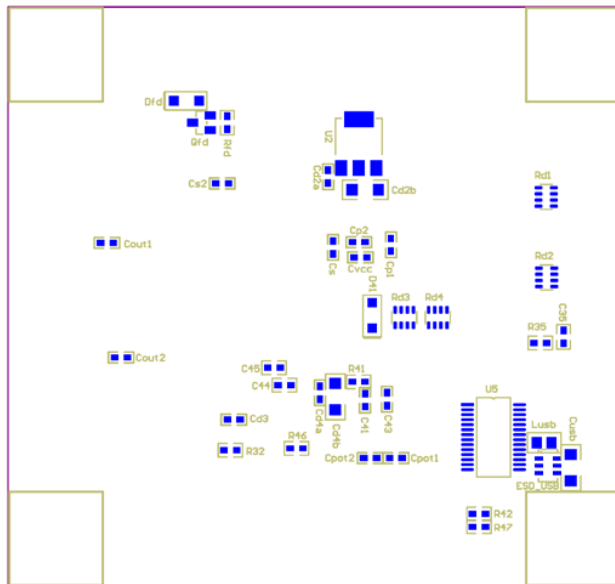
NCV7535 EVB PCB Bottom Assembly Drawing
